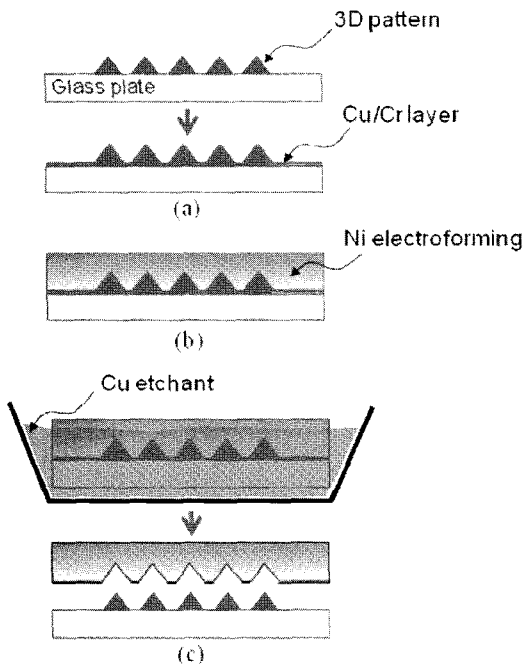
Fabrication process of nickel mold; (a) Cr/Cu deposition for seed layer, (b) nickel electroforming for shaping a mold, (c) after Cu-etching
